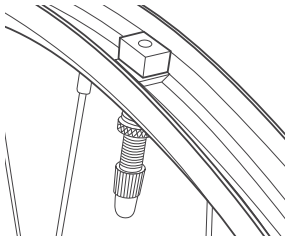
The U shape of the rim strip should face towards the center of the rim.
